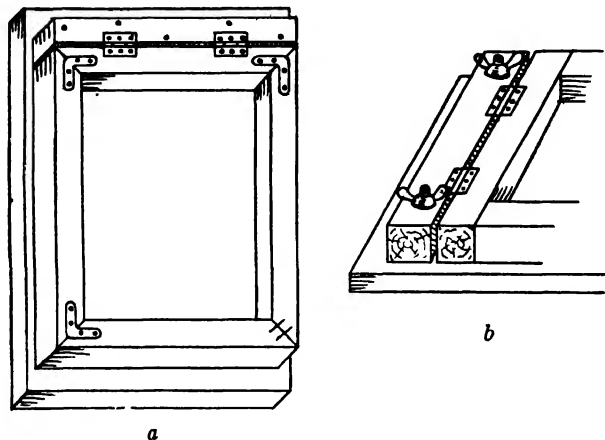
(a) Construction details of printing frame push-pin hinges, (b) Alternative method of assembling frame and base. Fast hinges, bolts and wing nuts.
